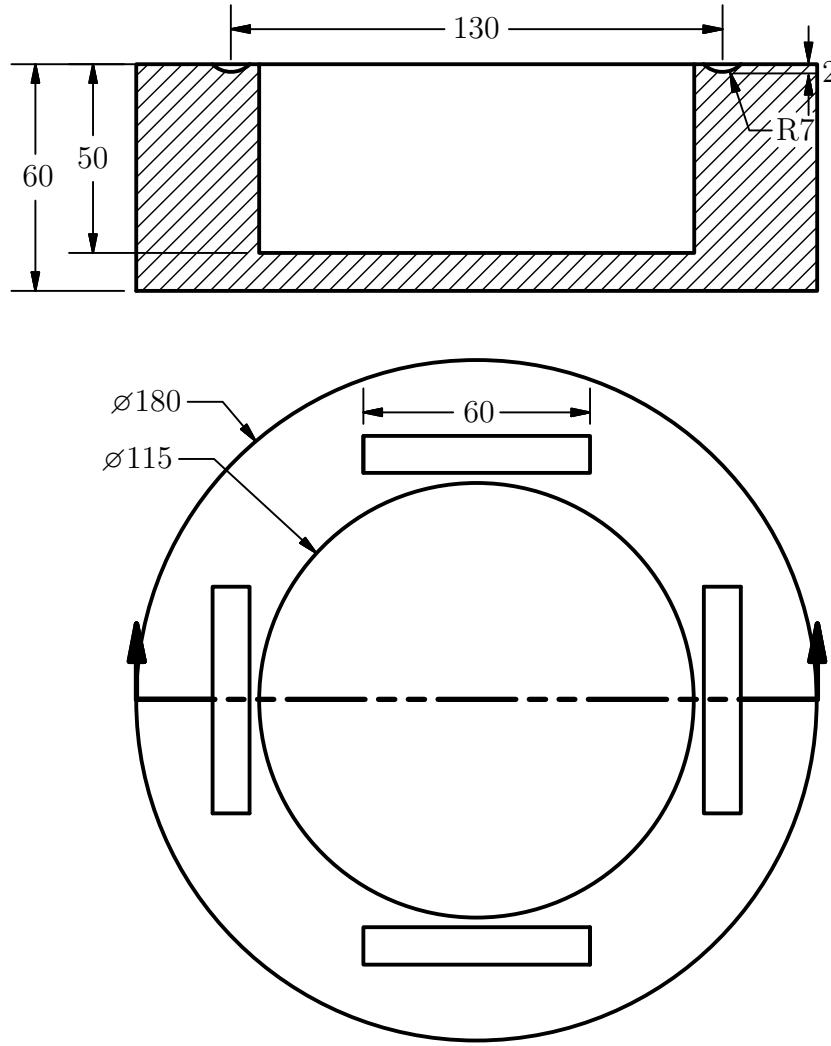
Base structure drawing with cross-section, detail on the 10 mm roller positions, radius 7 mm and depth 2 mm. All dimensions in mm, to scale.
